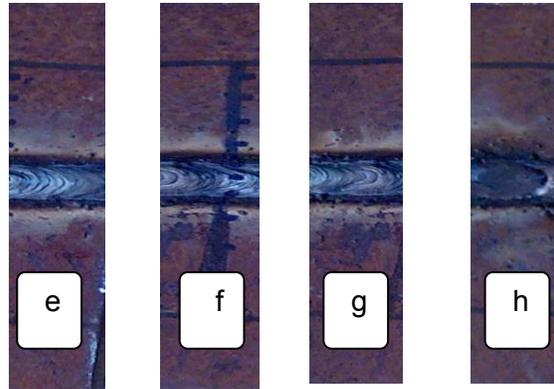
(e, f, g, & h) shows samples of the welding joint at double pass without preheating conditions
